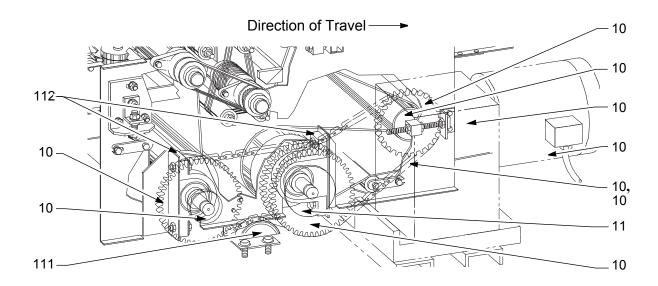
Drive Assembly, Dual Drive Diverter
